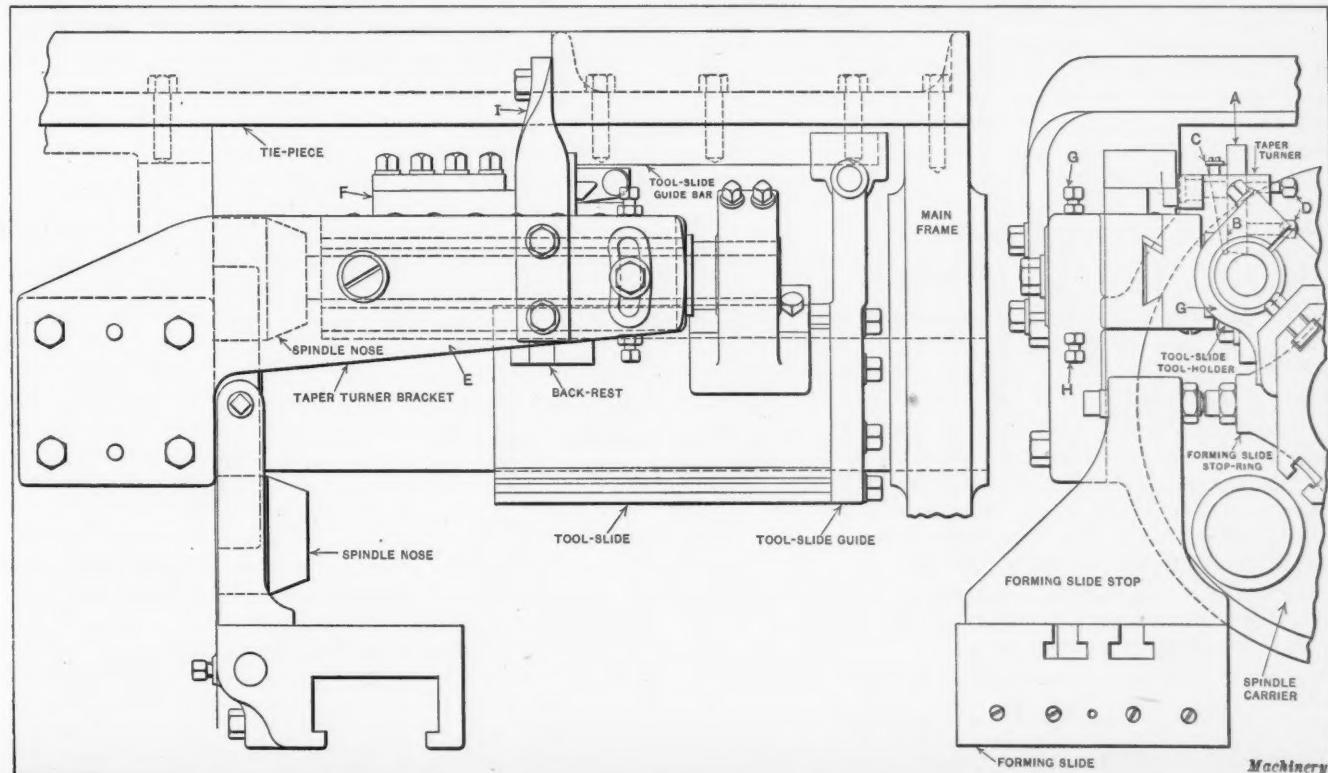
Details of Taper-turning Attachment shown in Fig. 35
